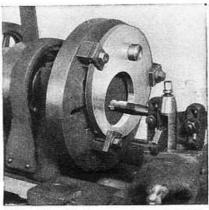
Boring an Eccentric on an 18-inch Lathe
